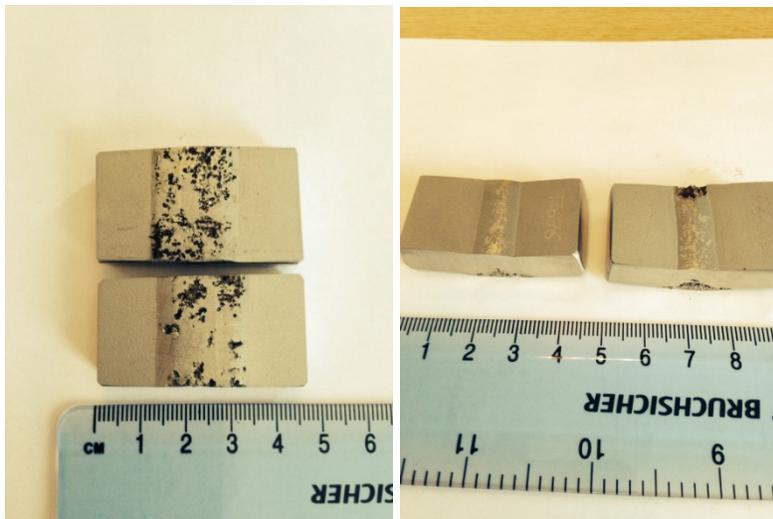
Appearance of the OD and ID of Ferric Chloride Corrosion Test Samples from 10"sch 40s Long Seam Welded Pipe After Testing
